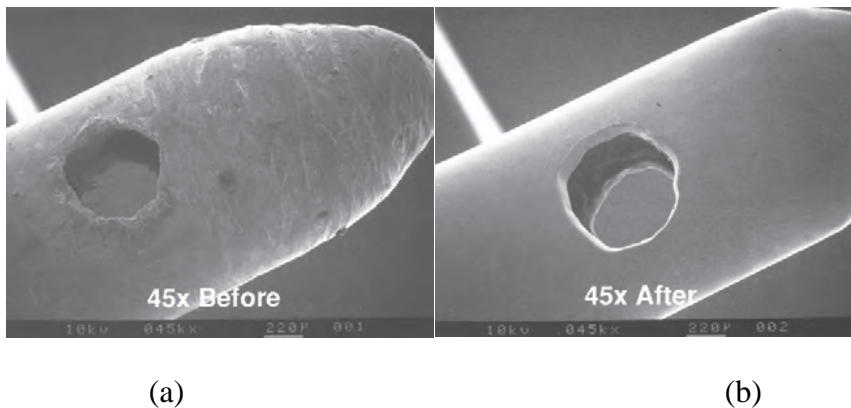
End of a tube with laser cut through hole (a) before (b) after passivation (61)
